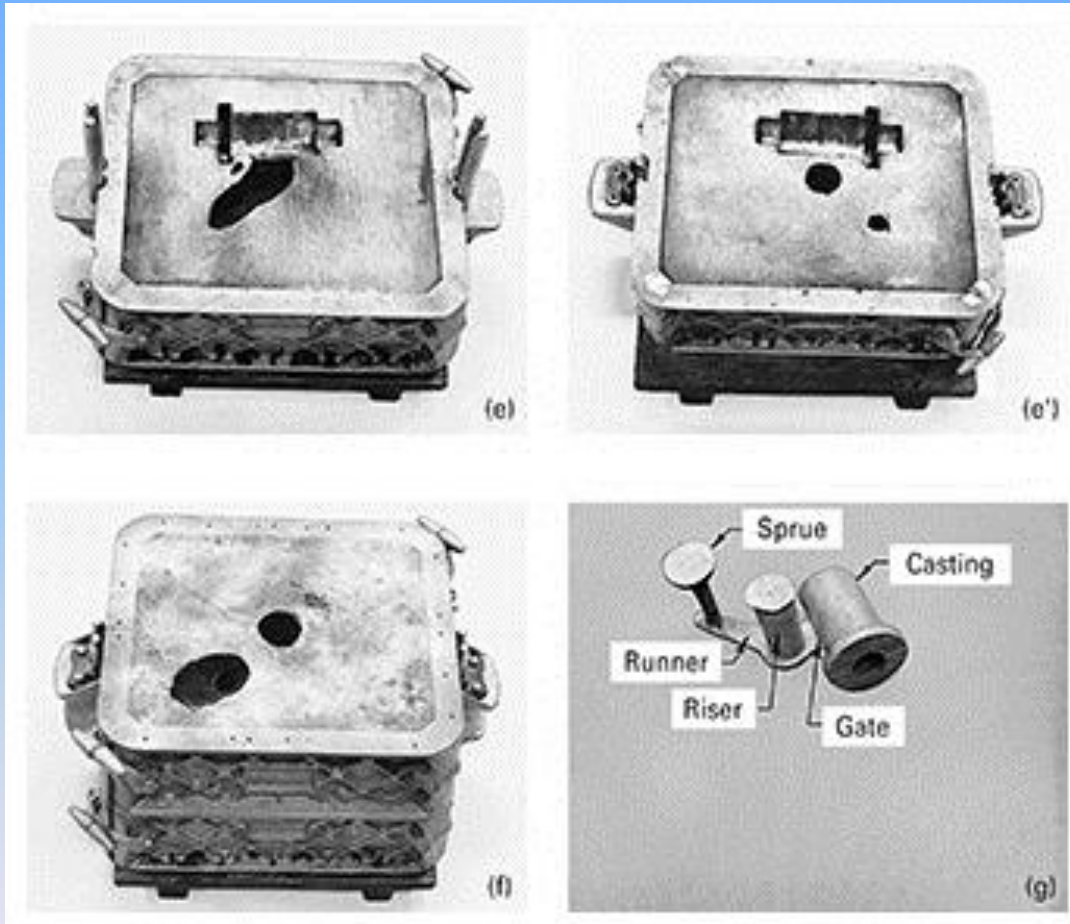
e) The mold is opened, the pattern board is drawn (removed), and the runner and gate are cut into the bottom parting surface of the sand. e') The parting surface of the upper or cope half of the mold is also shown with the pattern and pins removed. f) The mold is reassembled with the pattern board removed, and molten metal is poured through the sprue. g) The contents are shaken from the flask and the metal segment is separated from the sand, ready for further processing.
